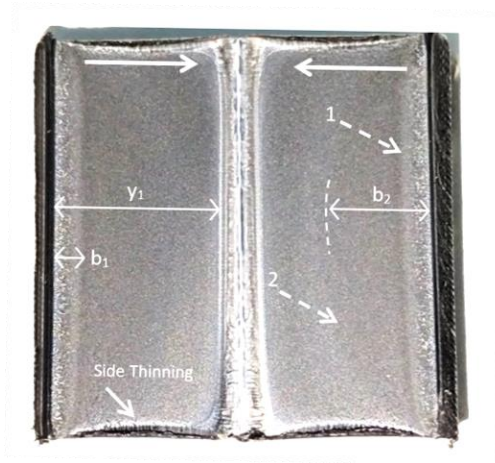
A photomicrograph of global fracture surface from an unaged specimen (AR);
